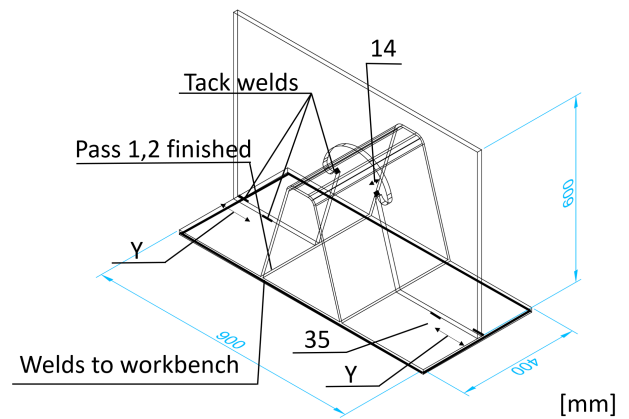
Tack welds after fitting the crossbeam. Distance Y is 140-180mm, depending on the specimen
